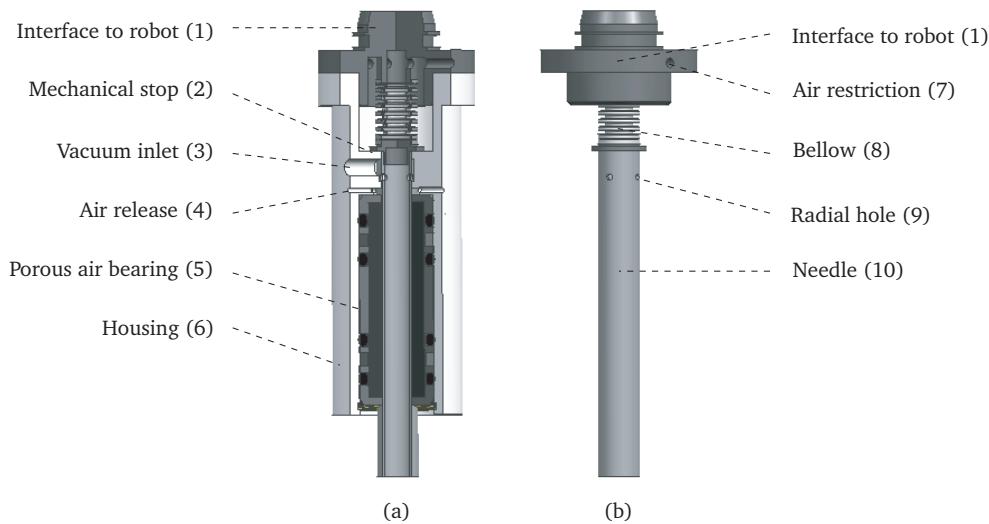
Schematic of the new gripper design, (a) front view of the gripper with a cutout section, (b) subassembly of the needle, bellow and interface to the robot.
